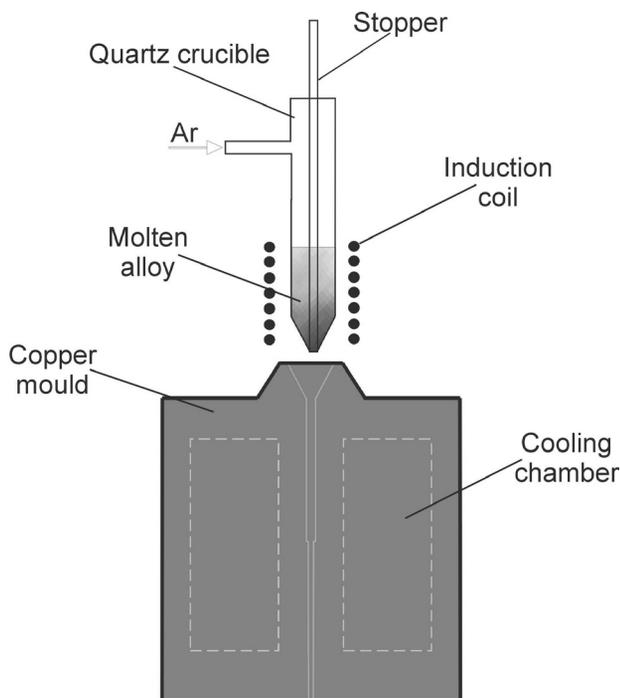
Schematic illustration of the pressure die casting equipment used for casting bulk amorphous rods
